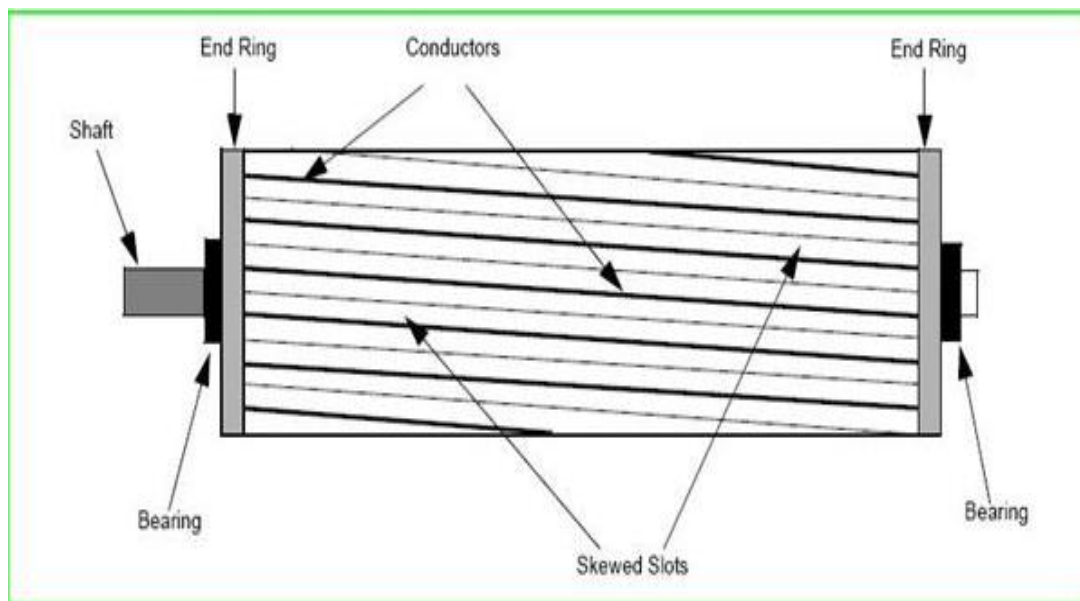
Squirrel Cage Rotor constructions, (photo courtesy of www.tpub.com retrieved on 29 Nov 2013)
